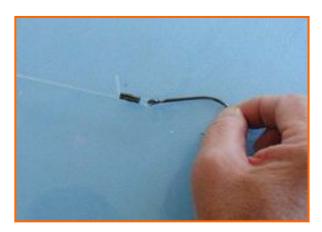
Tag end may be trimmed to form "pin"
